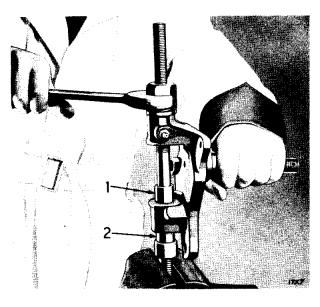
Removing King Pin Bushing (Reverse Elliott Type Axle)
